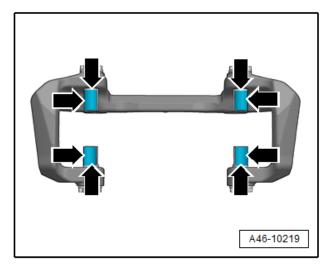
Caliper carrier guide pins with anti-seize (G 052560A2) lubricant applied where the pads make contact.
